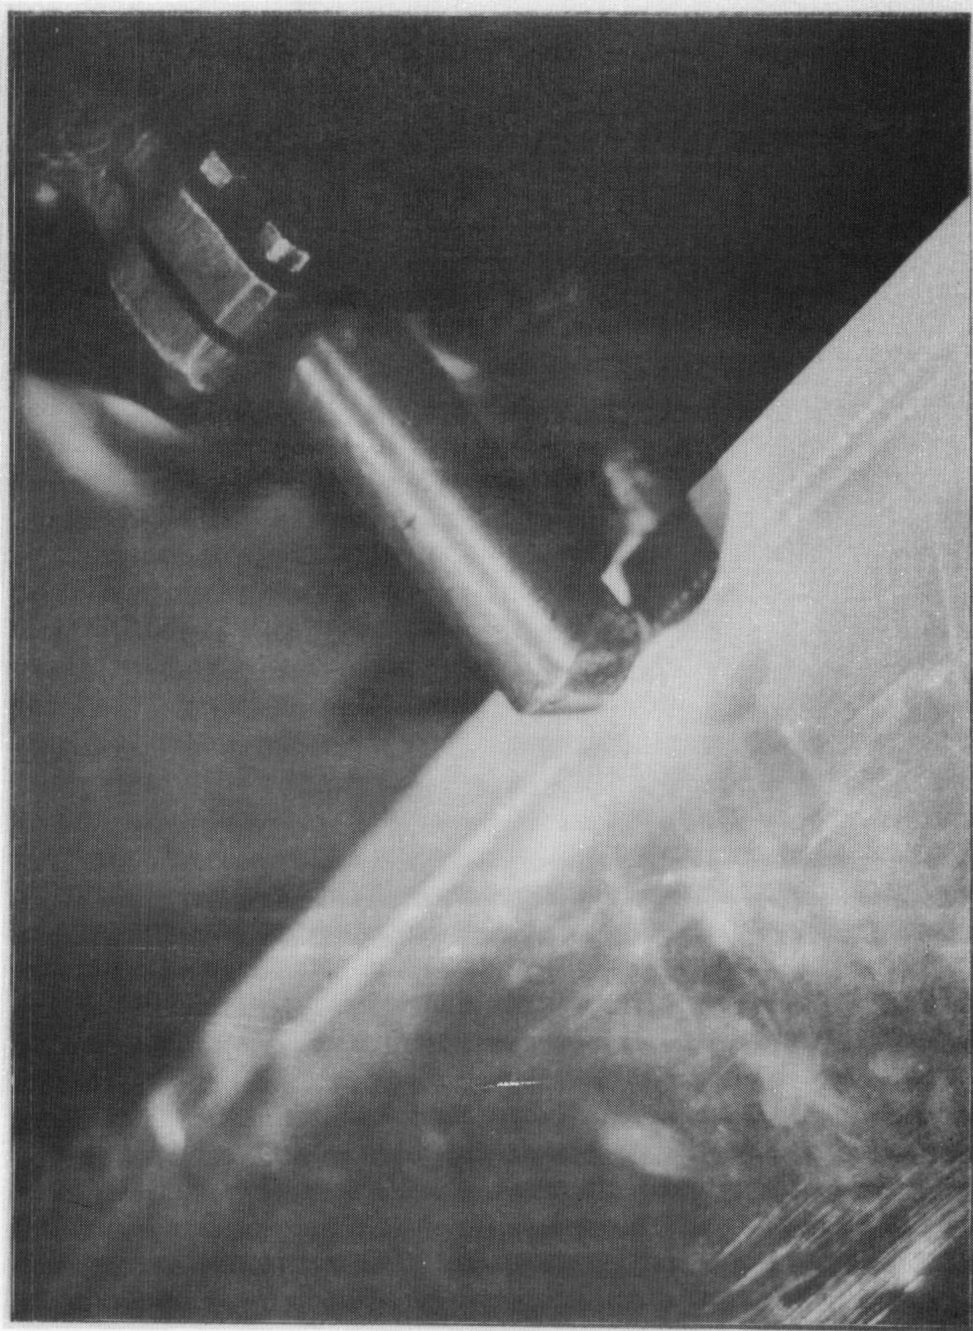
MEMBRANE TO RING WELD DETAIL
